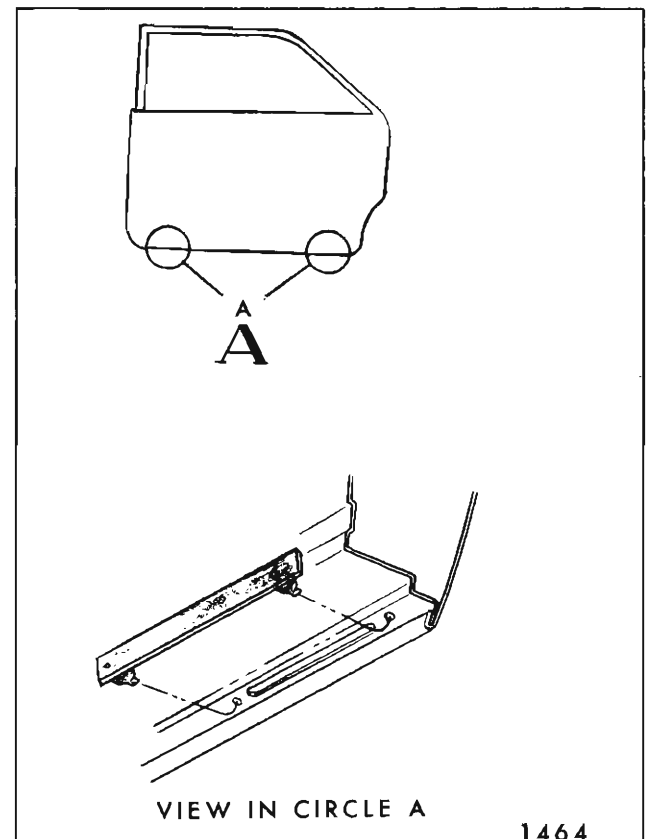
D5—Door Bottom Drain Hole Sealing Strip
